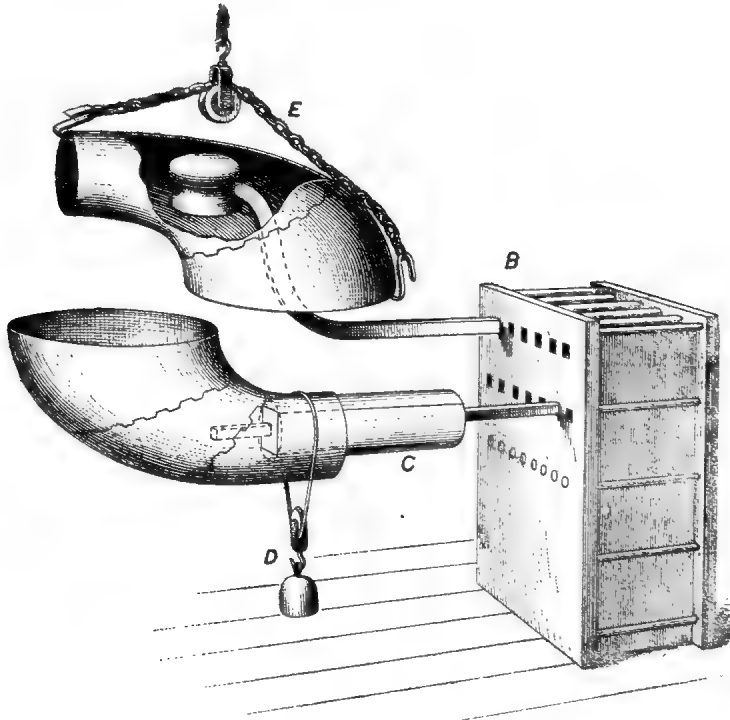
Planishing the Air Pipe on Head and Mandrel.
